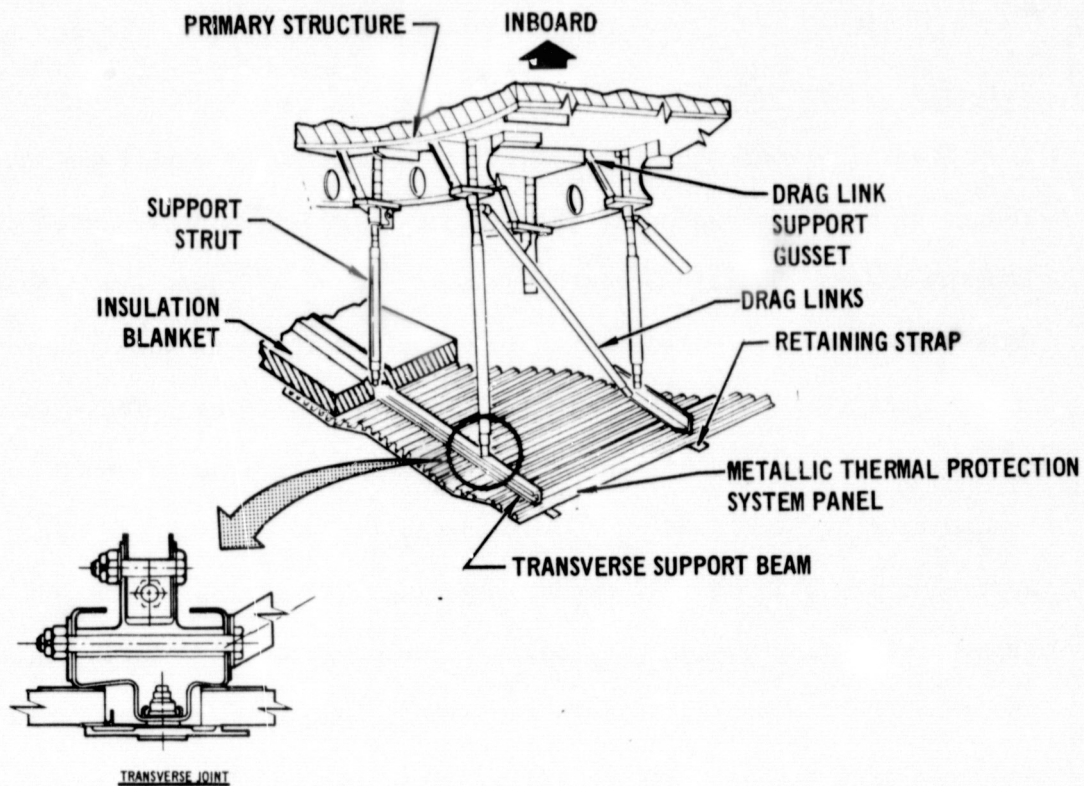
TYPICAL METALLIC THERMAL PROTECTION SYSTEM STRUCTURE
